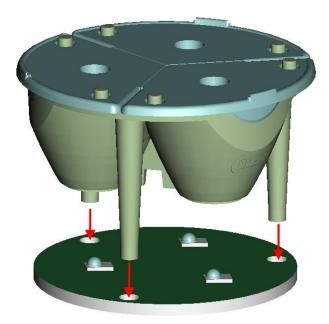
The three legs on the tri-lens require clearance holes in the circuit board. The legs have stepped diameters. The smaller diameter allows the leg to fit into the holes on the PCB. The larger diameter is intended to contact the top of the PCB and provide proper height alignment of the lens to the LED.
